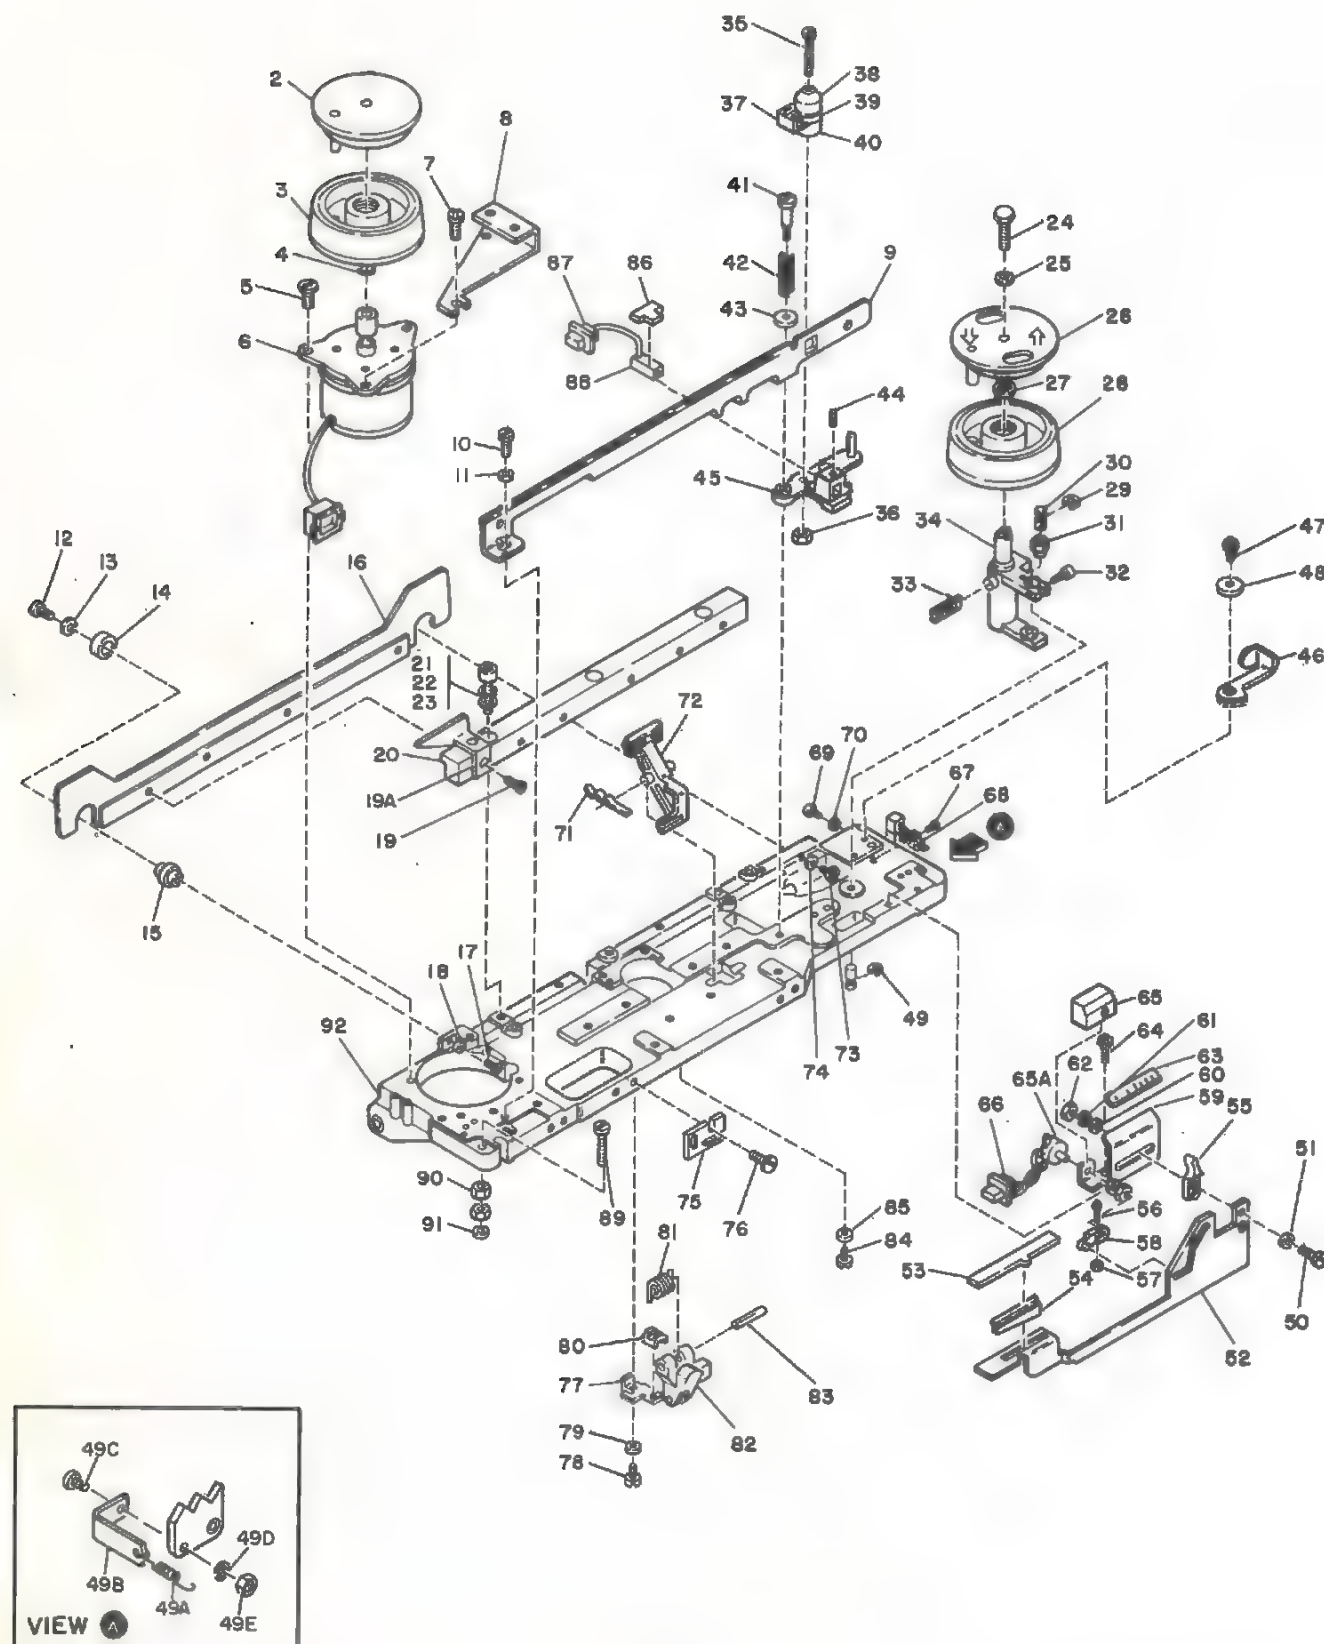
FRONT ASSEMBLY. SEE LIST 5.
